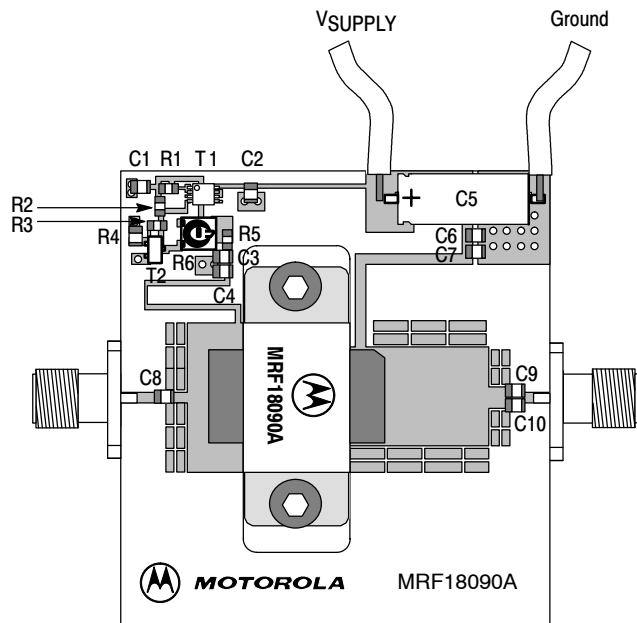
1.80 - 1.88 GHz Demo Board Component Layout
